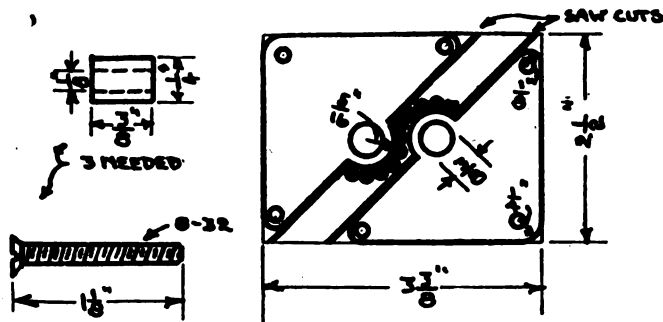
Complete details of the stator plates, bolts, and bushings for the panel mounting of a single-blade vernier.
